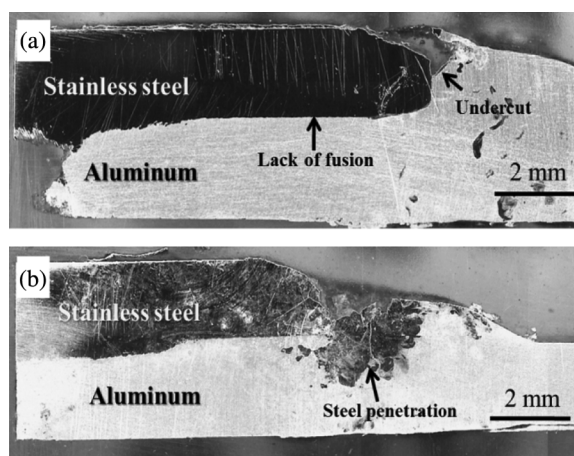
Cross-sectional view of the (a) nonpreheated and (b) preheated aluminum–stainless steel TIG welding [65].
